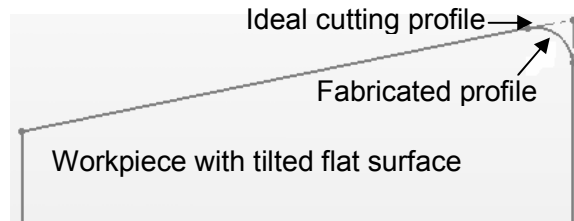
Graphical illustration of over cut phenomenon happened in FTS machining of tilted flat surface.
